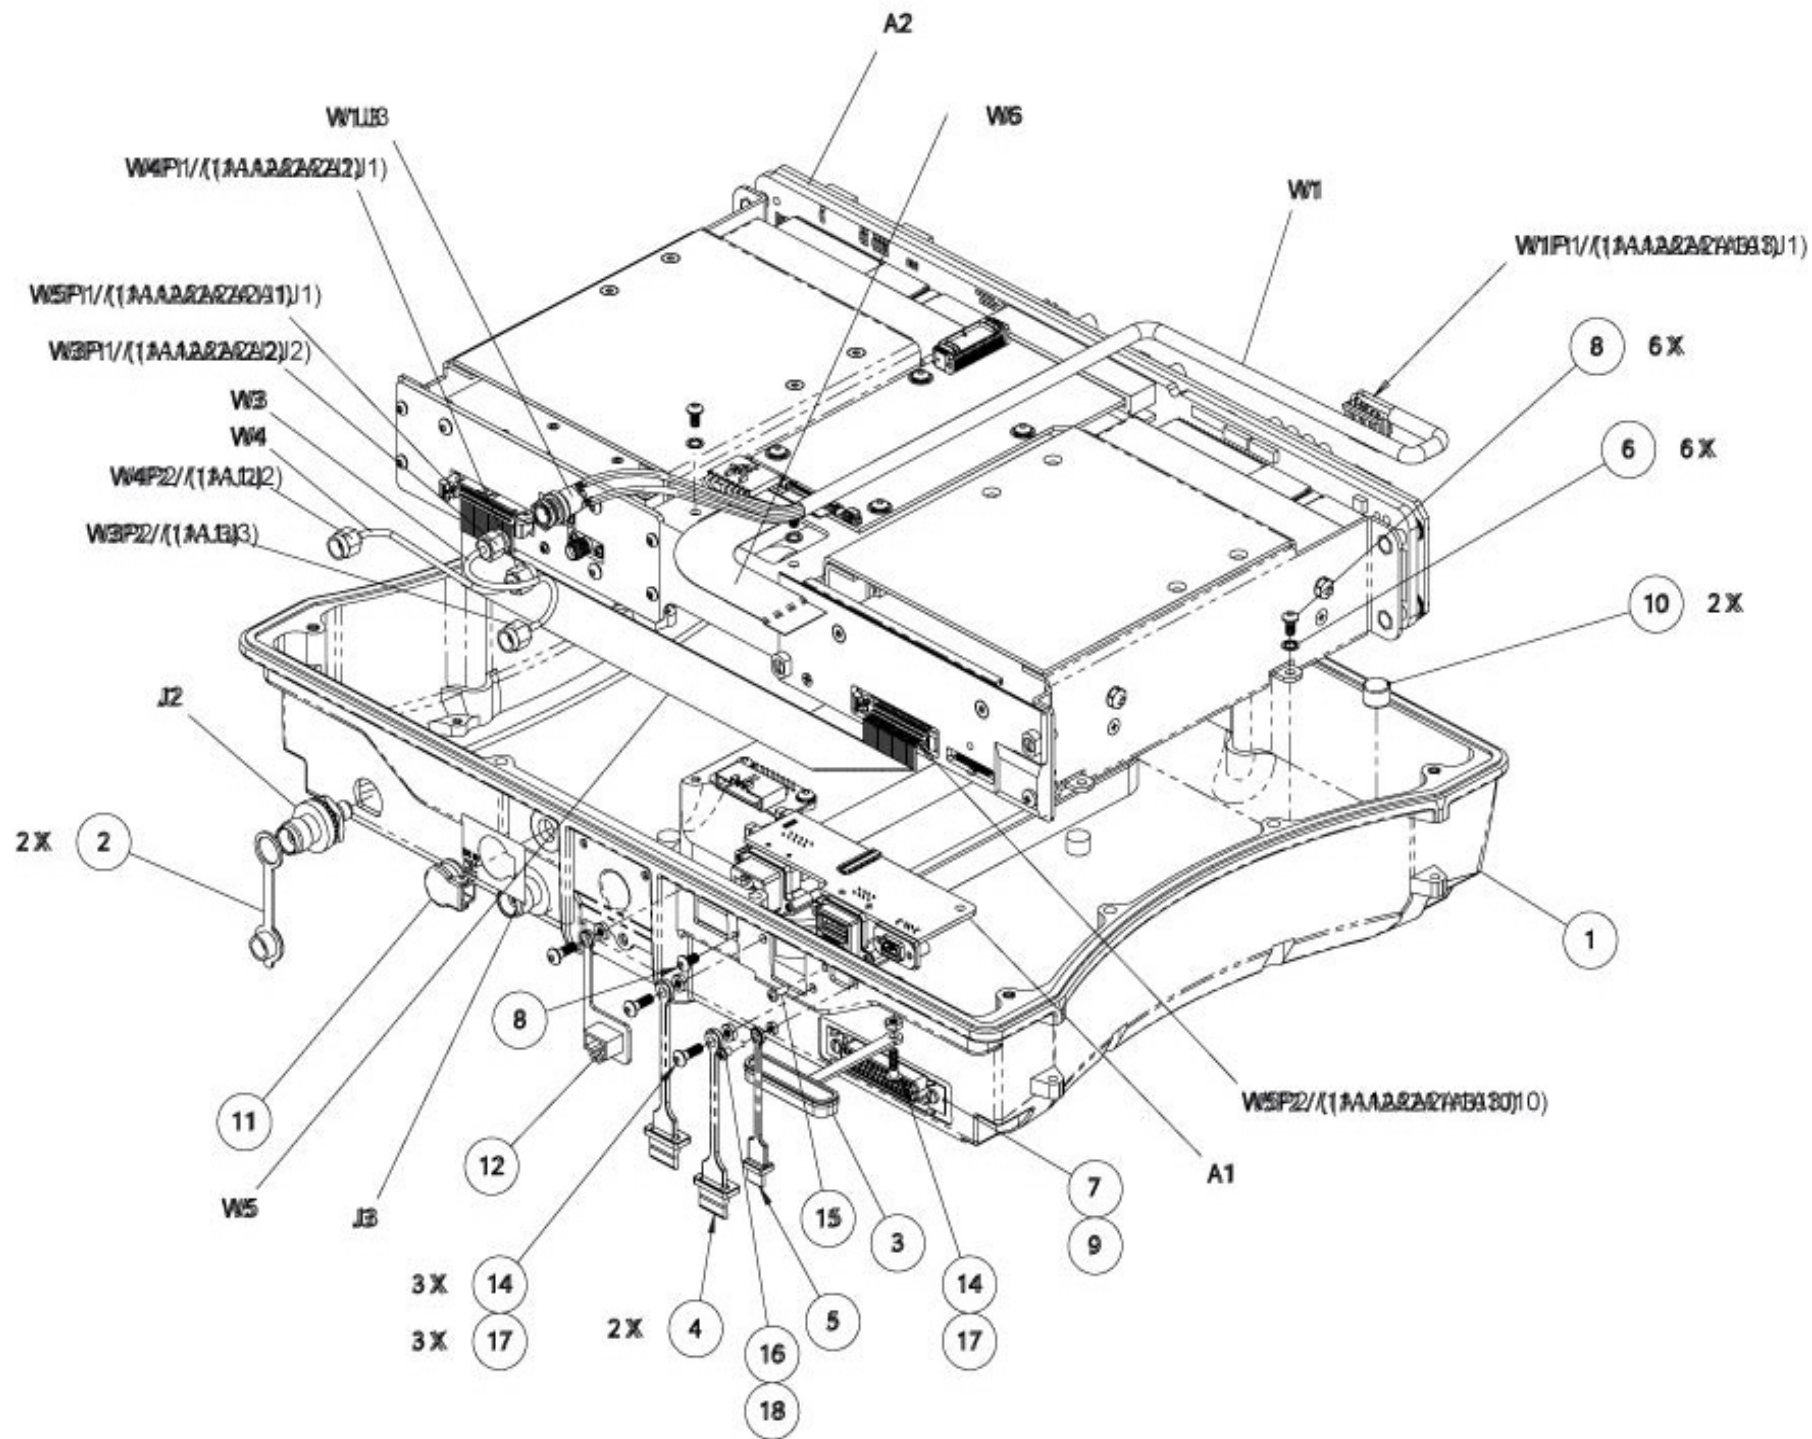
ALT-8000 RAD/ALT Base Mech Assembly (A1A2)
